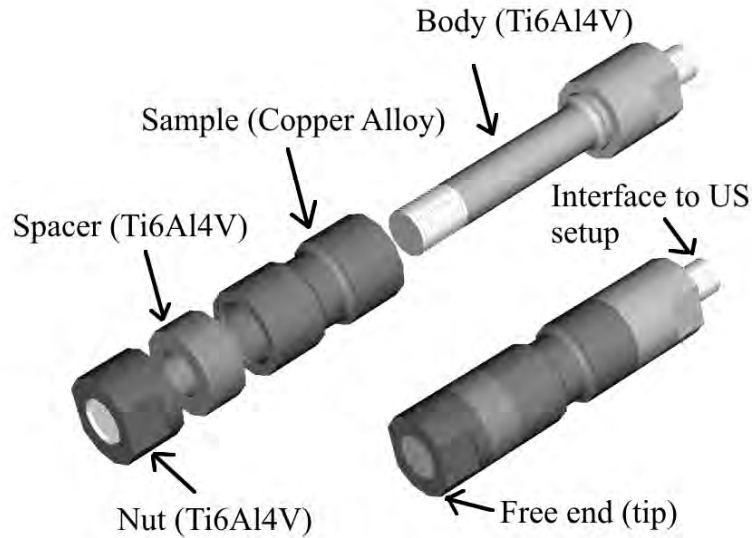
The exploded and assembled views of the special pre-stressed sonotrode. The sample made of the desired copper alloy is hollow, but the outside geometry of the assembly is identical to the standard sonotrodes.
